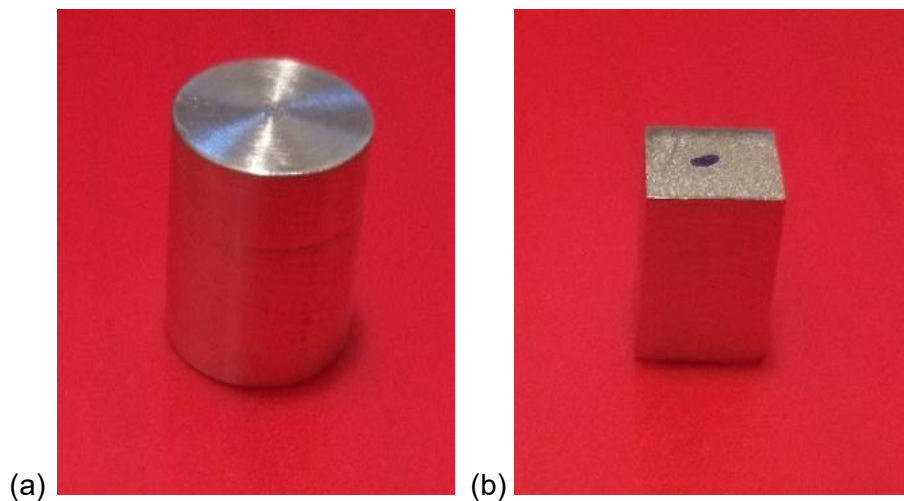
(a) Cylindrical specimen and (b) cuboid specimen
